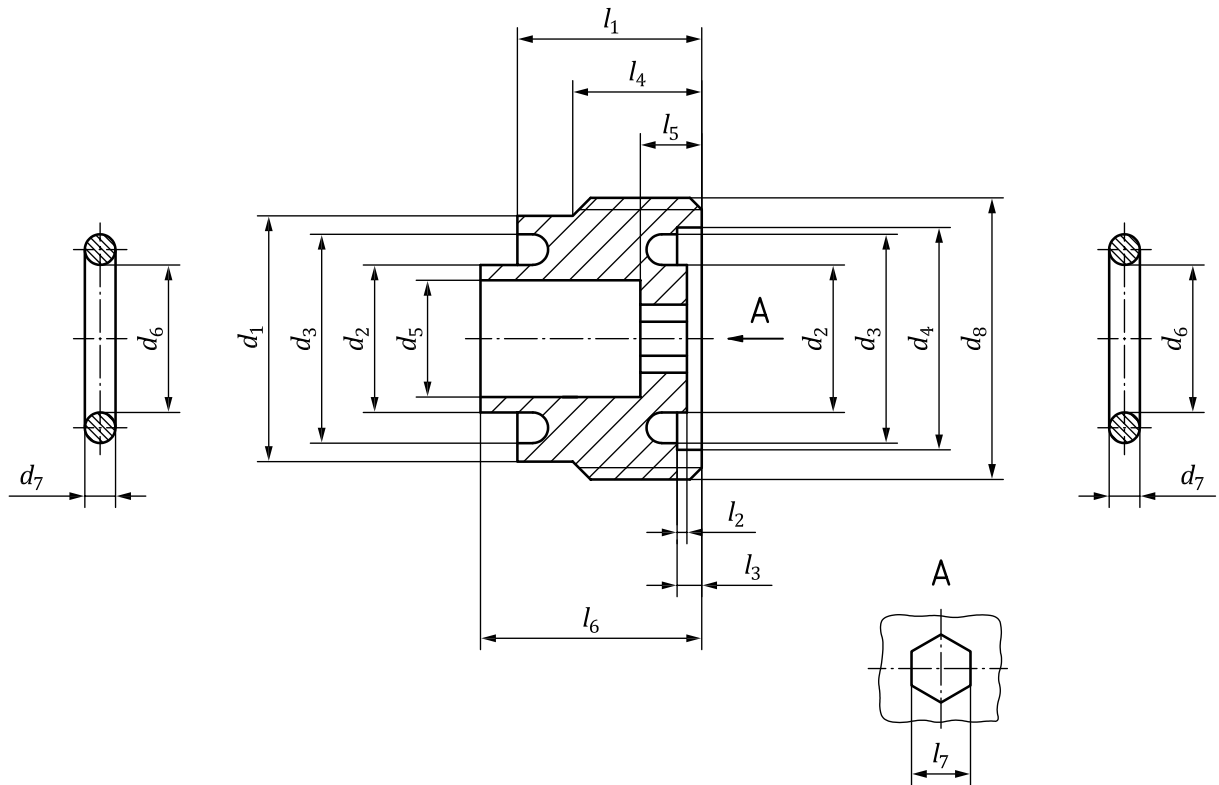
Adaptor and o-rings to convert from 232 bar threaded to 232 bar yoke type outlet connection
